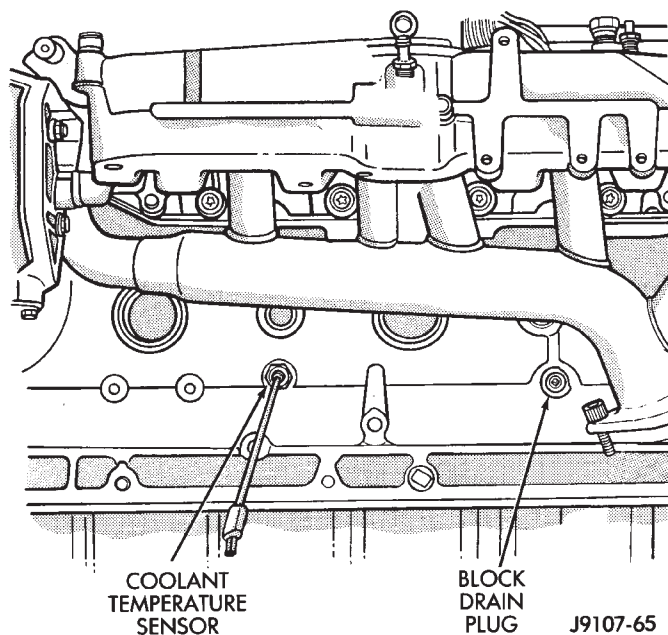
Draining Coolant—4.0L 6-Cylinder Engine
